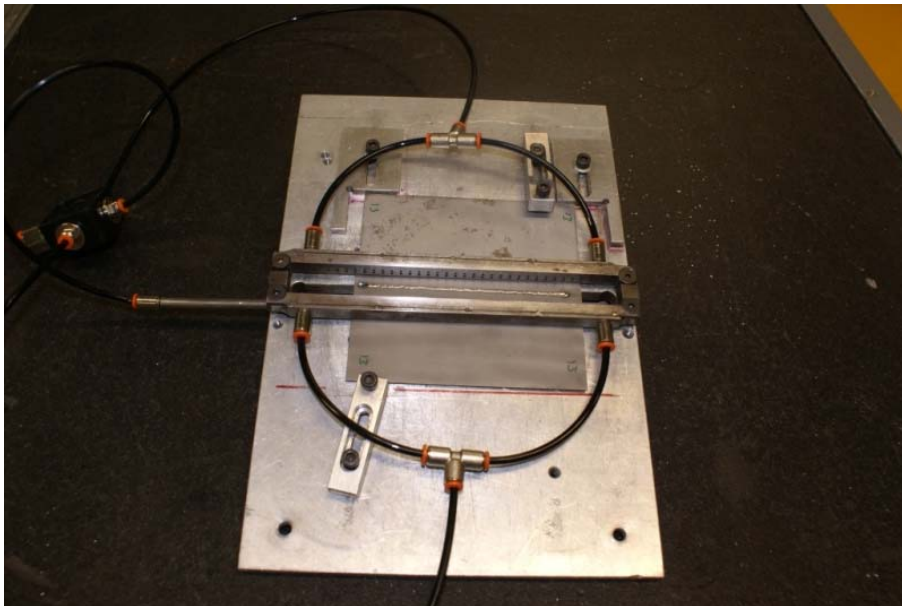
(c): Photograph of unmovable three parts of shrouding system and gas hoses with specimen.
